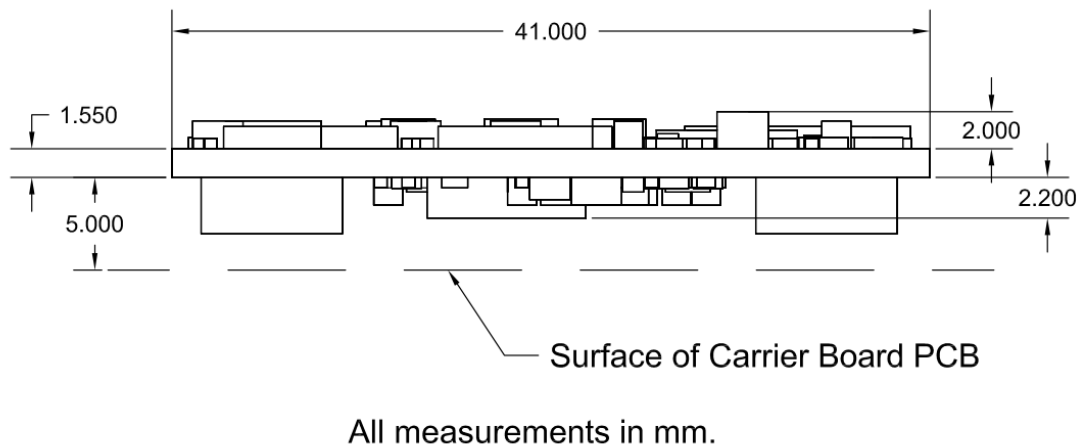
phyCORE-i.MX7 Mechanical Dimensions (profile view)
